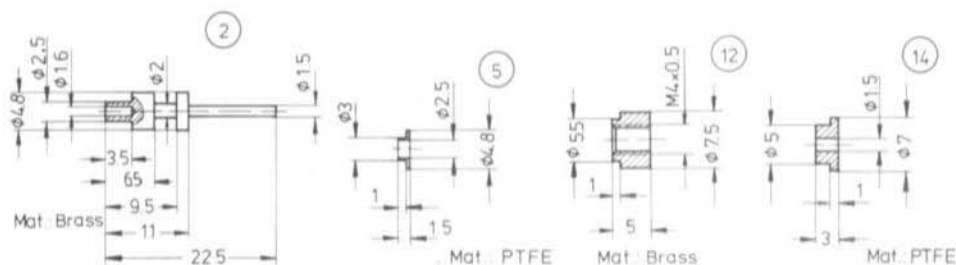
A few parts for the construction shown in Figure 1; other parts see parts list.
